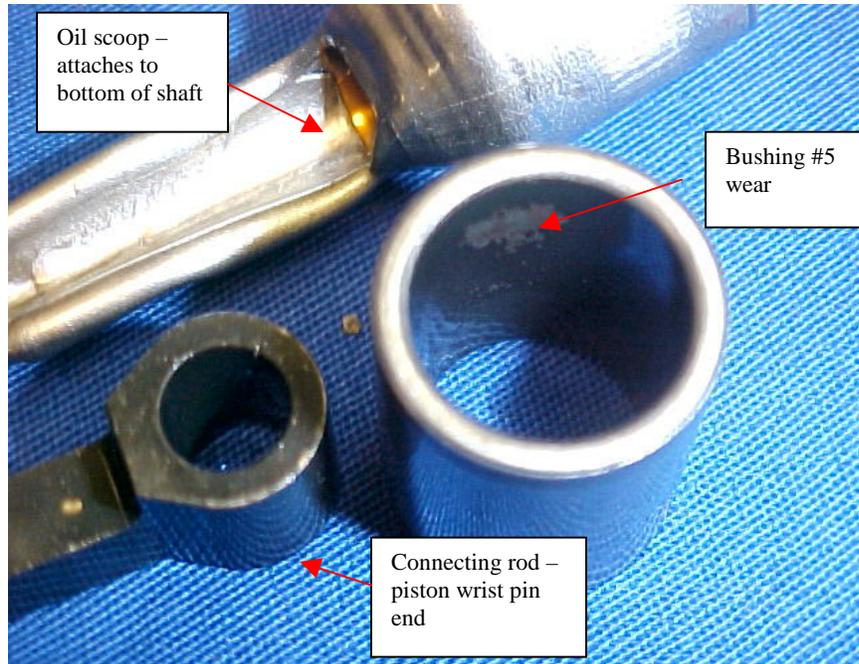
Compressor 5 view showing top end of compressor assembly with crank pin, bushing, and piston connecting rod clearly visible.
